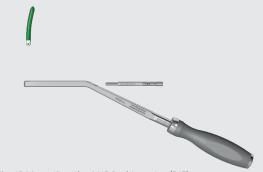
Mounting the MIS Rod Inserter (RIF)
